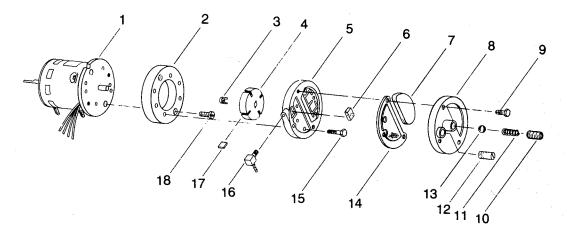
Replacement Parts Illustration for Motor and Pump Assembly Model F50E
